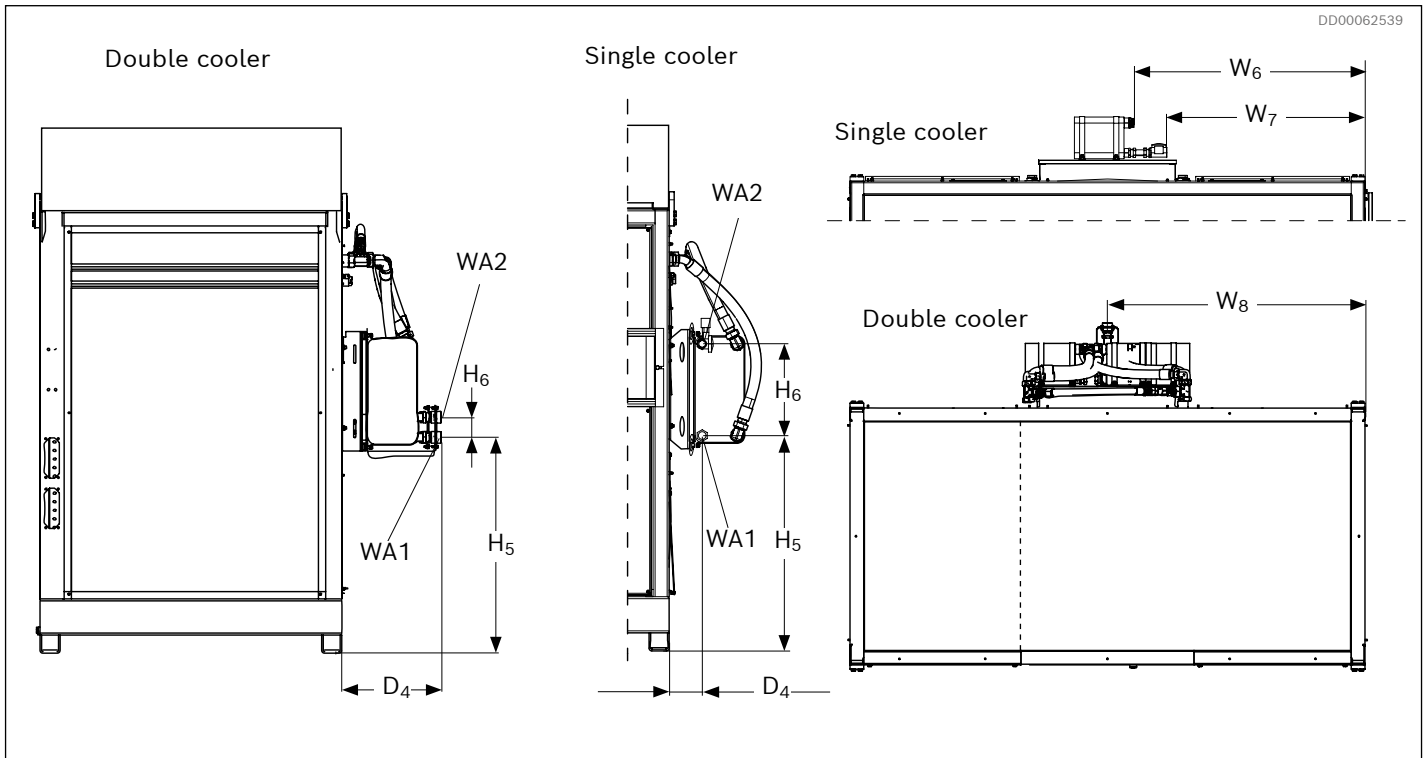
Right side and top view, example DUE Medium and plate cooler
